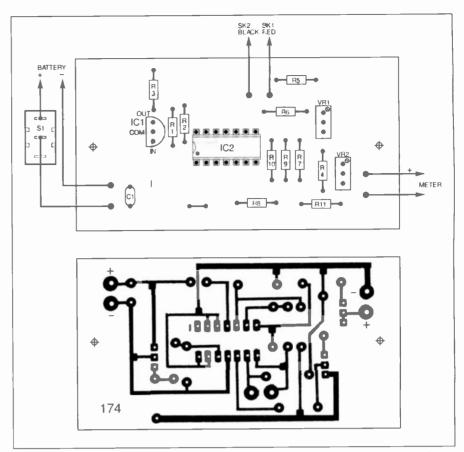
Printed circuit board component layout. off-board wiring details and full size underside copper foil master pattern.
